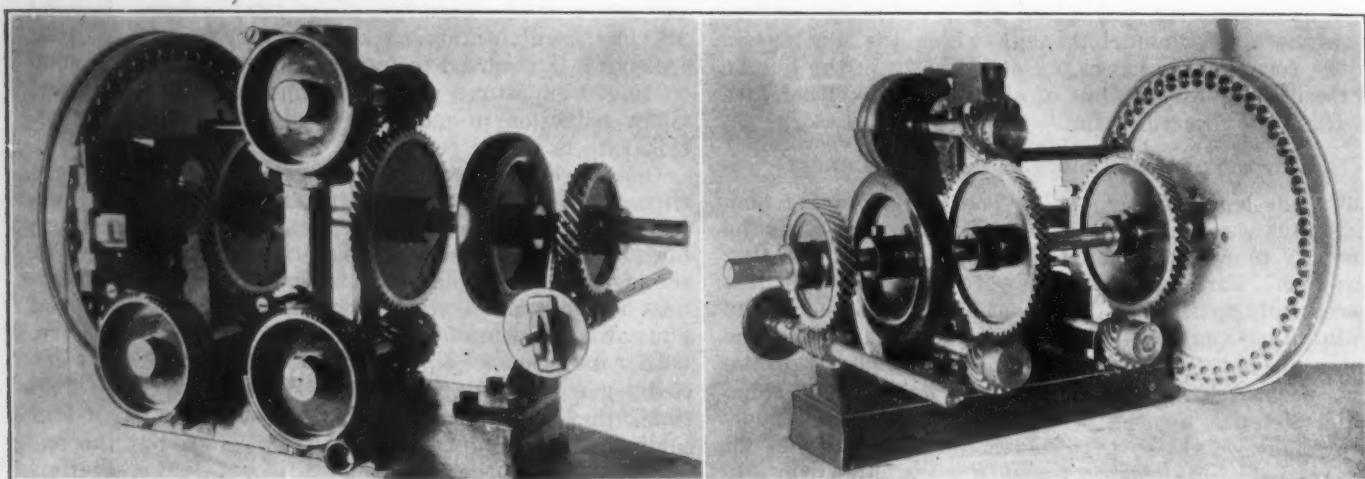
LENS DISC, DRIVE GEARS AND RELATED MECHANISM OF THE SLOW-MOTION CAMERA
